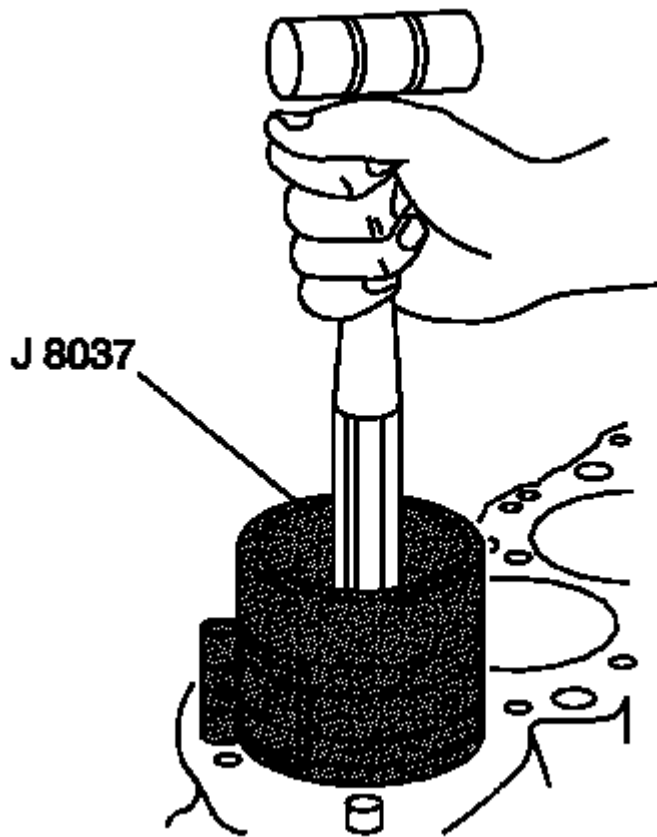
View of Installing Piston & Connecting Rod Assembly Into Engine
